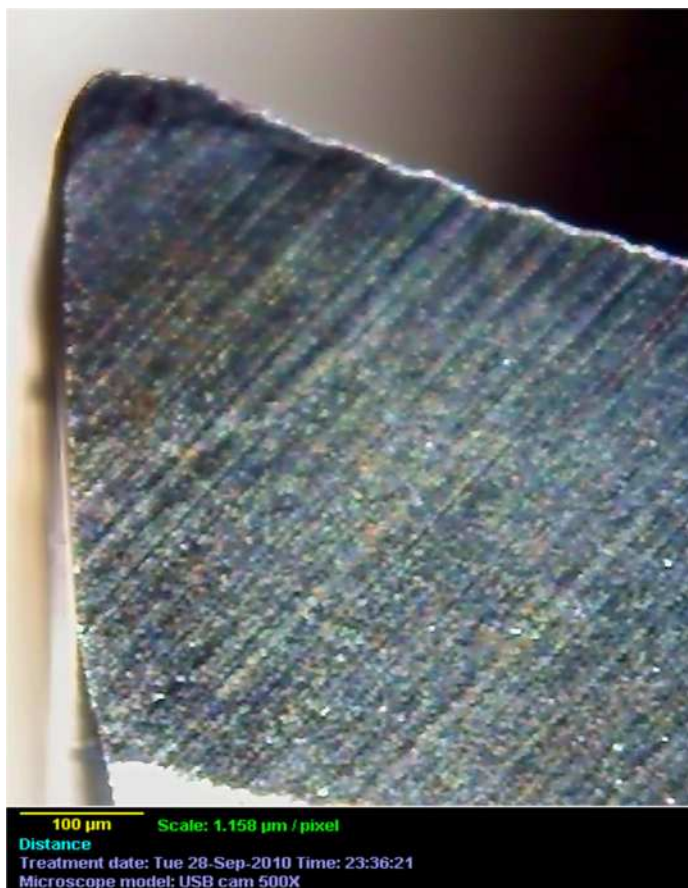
Fresh Tool (The Wear = 10 μm)
